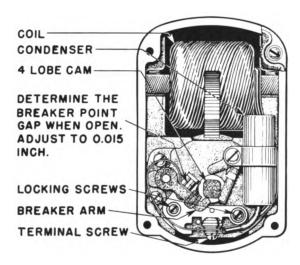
End View of Type FM-XV4B Magneto. bearing support. Lock the assembly in place by tightening the locking screws and take a final measurement of the breaker point gap after the locking screws are tightened.
